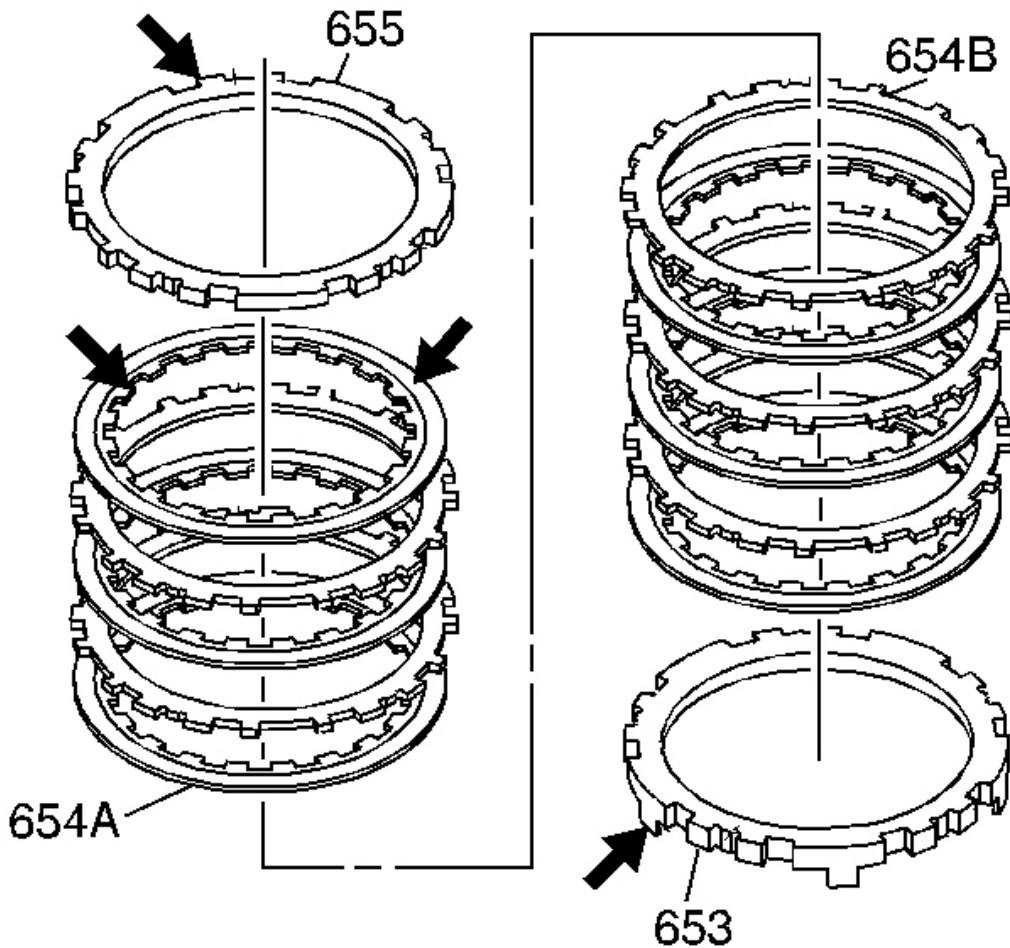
View Of Inspection Areas On Clutch Apply Plates
